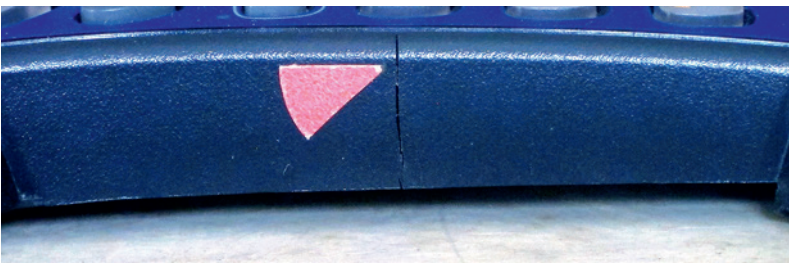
Cracks in part “unwarped” when assembled [8]
